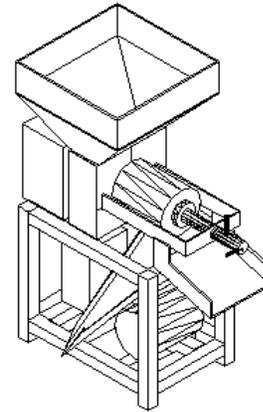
Design Sketch of Moringa Juice Extractor
